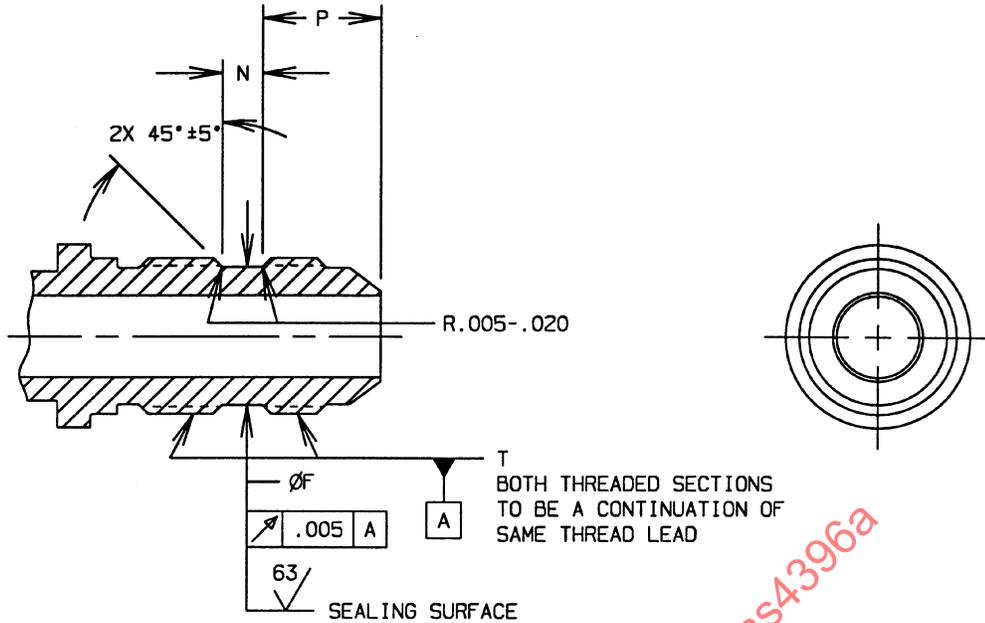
FITTING END DESIGN, STYLE S, SAME AS STYLE G EXCEPT AS SHOWN
